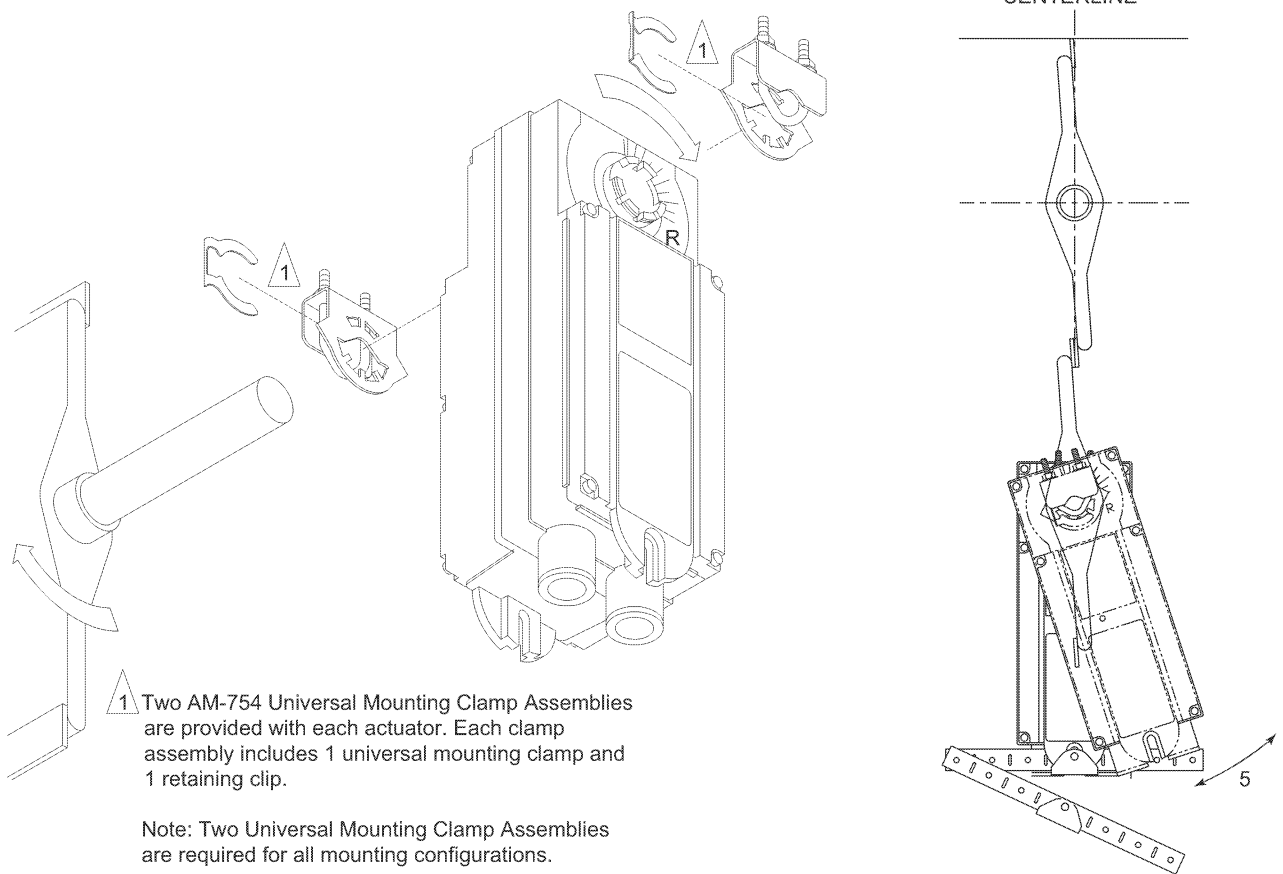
Long Damper Shaft Installation and Actuator Parts Identification.
